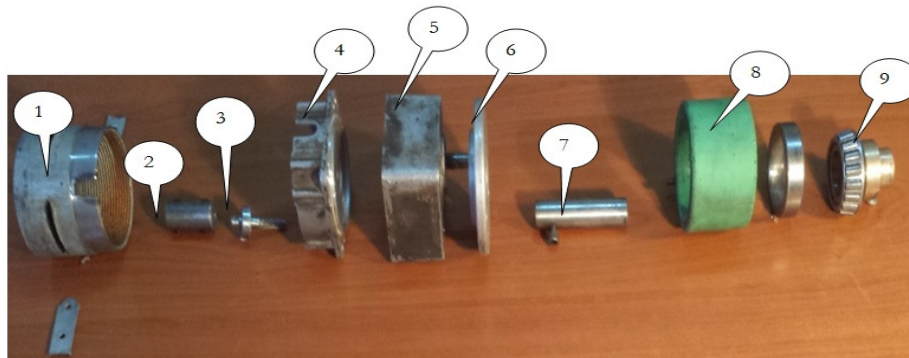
Exploded view of the mechanical assembly of the vertical axis
